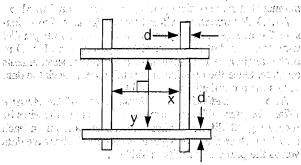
Proper Dimensioning of Wire Cloth Mesh
